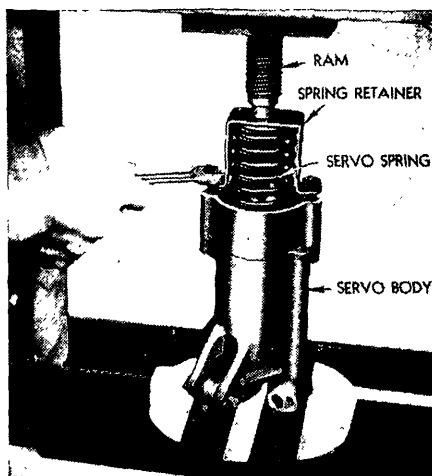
Assemble accumulator parts into servo body, place in press and tighten retaining screws. Use extreme care to avoid breaking oil seal ring on compressor piston. Test operation of servo by applying air pressure in rear band release passage
